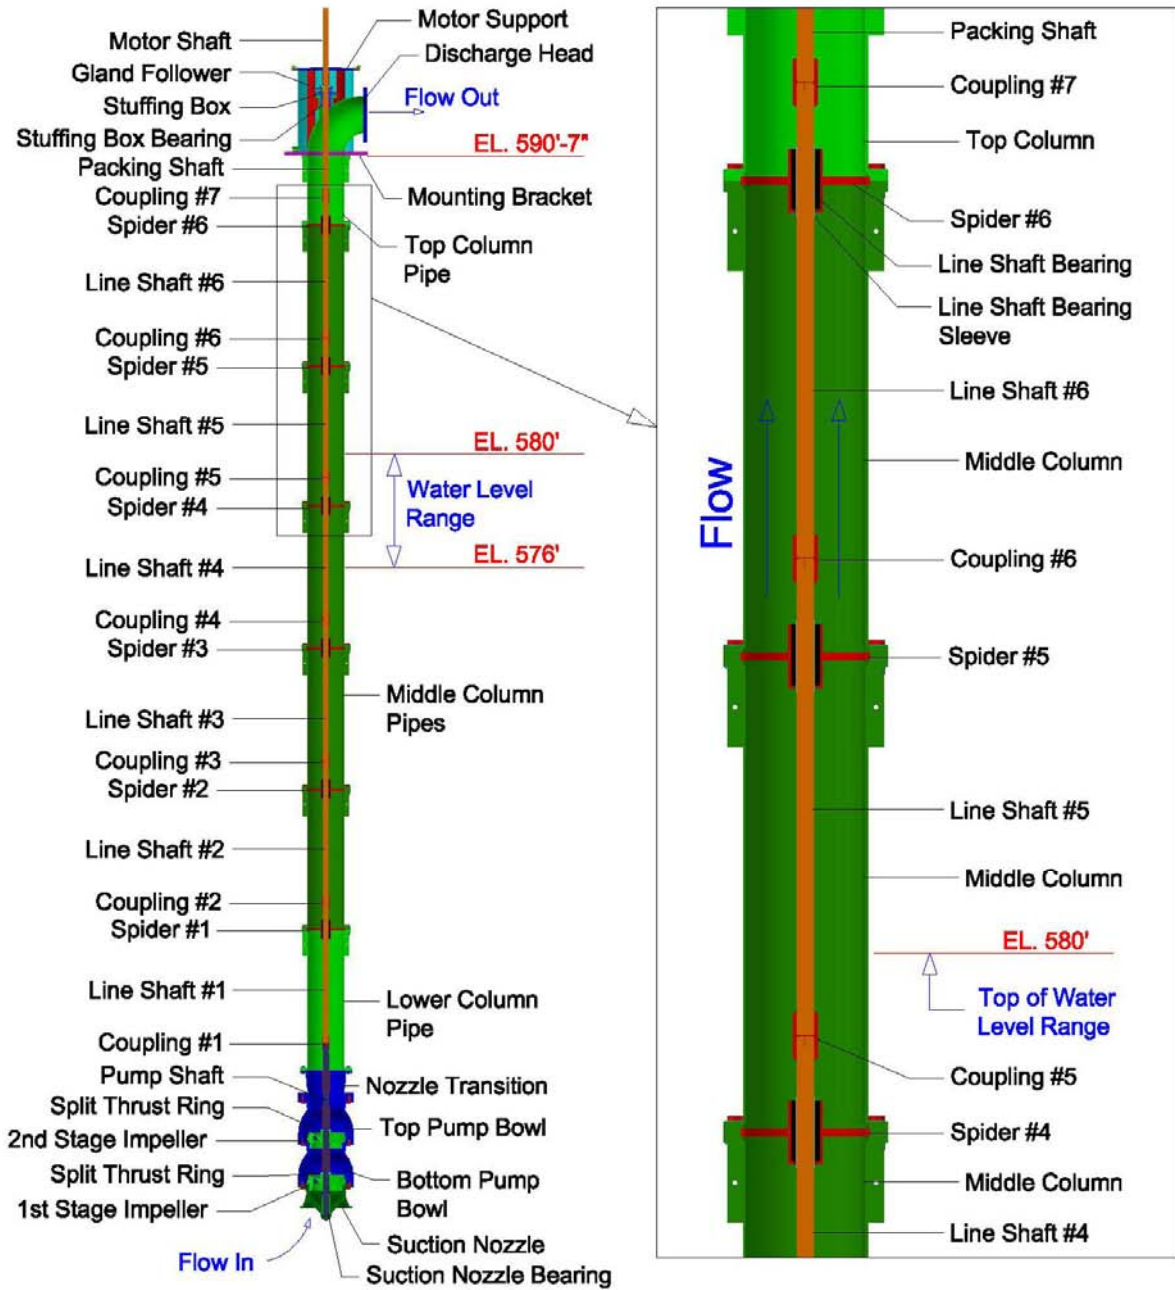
SWS Pumps Shaft Assembly [3b]
